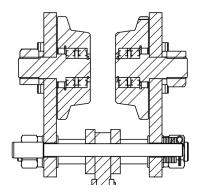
10 Ton Hoist Mounted on an Electric Trolley
